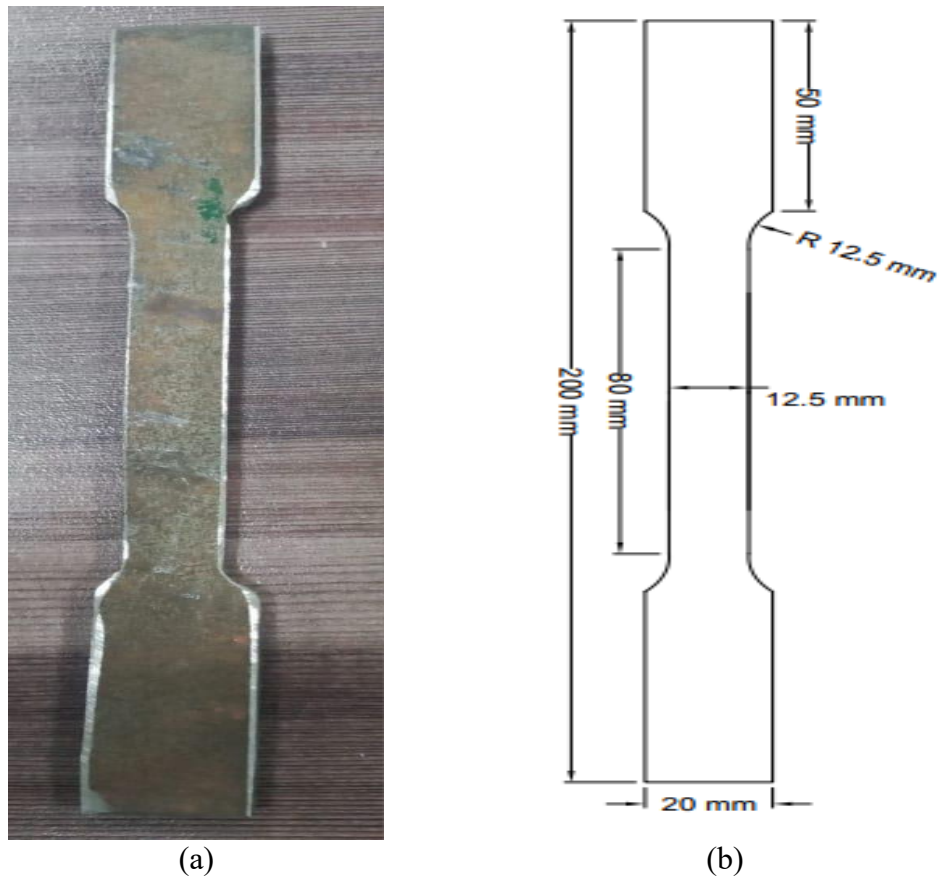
(a) Tested coupon (b) Dimensioned coupon
